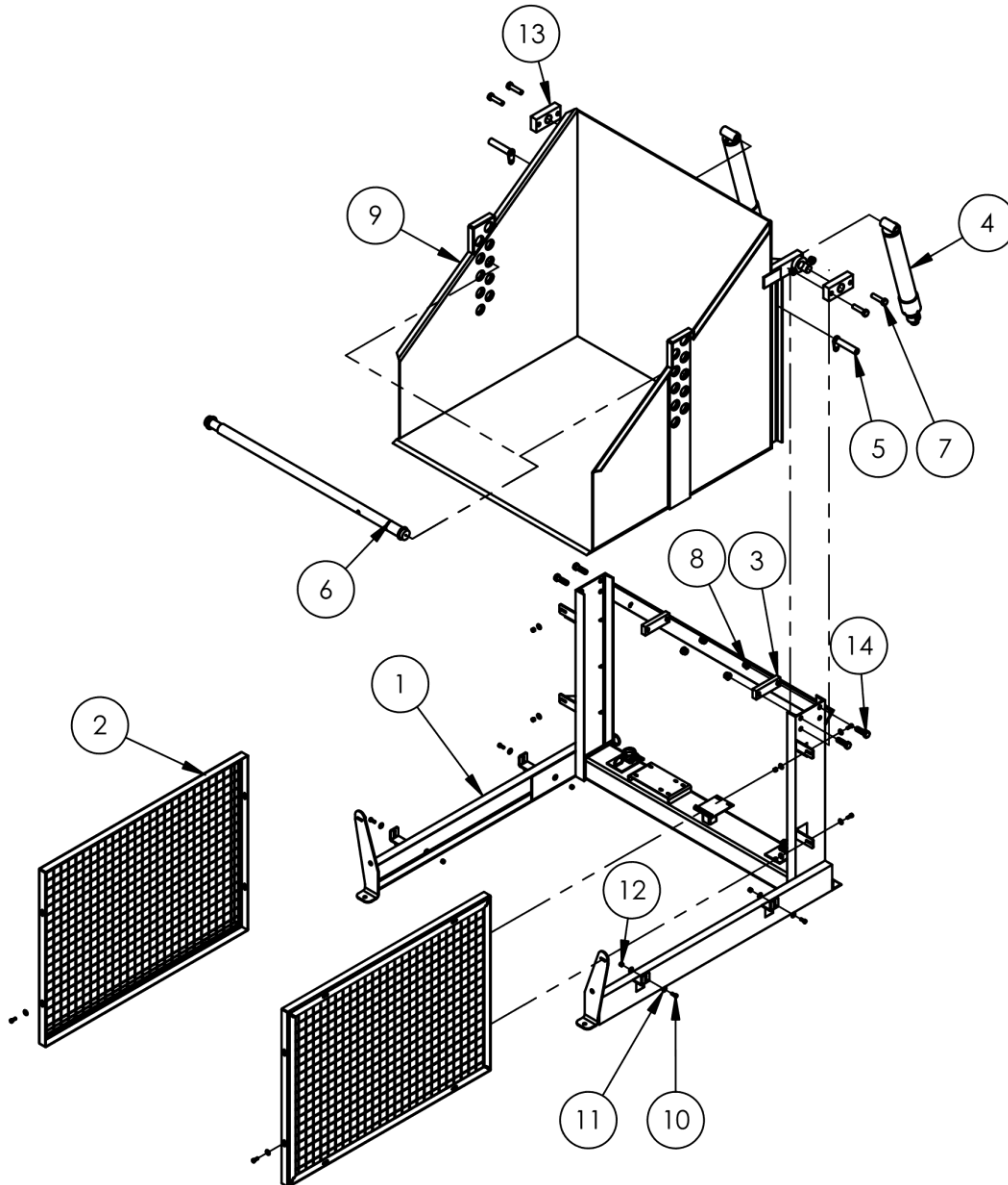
A: HBD-2-36 EXPLODED VIEW & BILL OF MATERIALS
